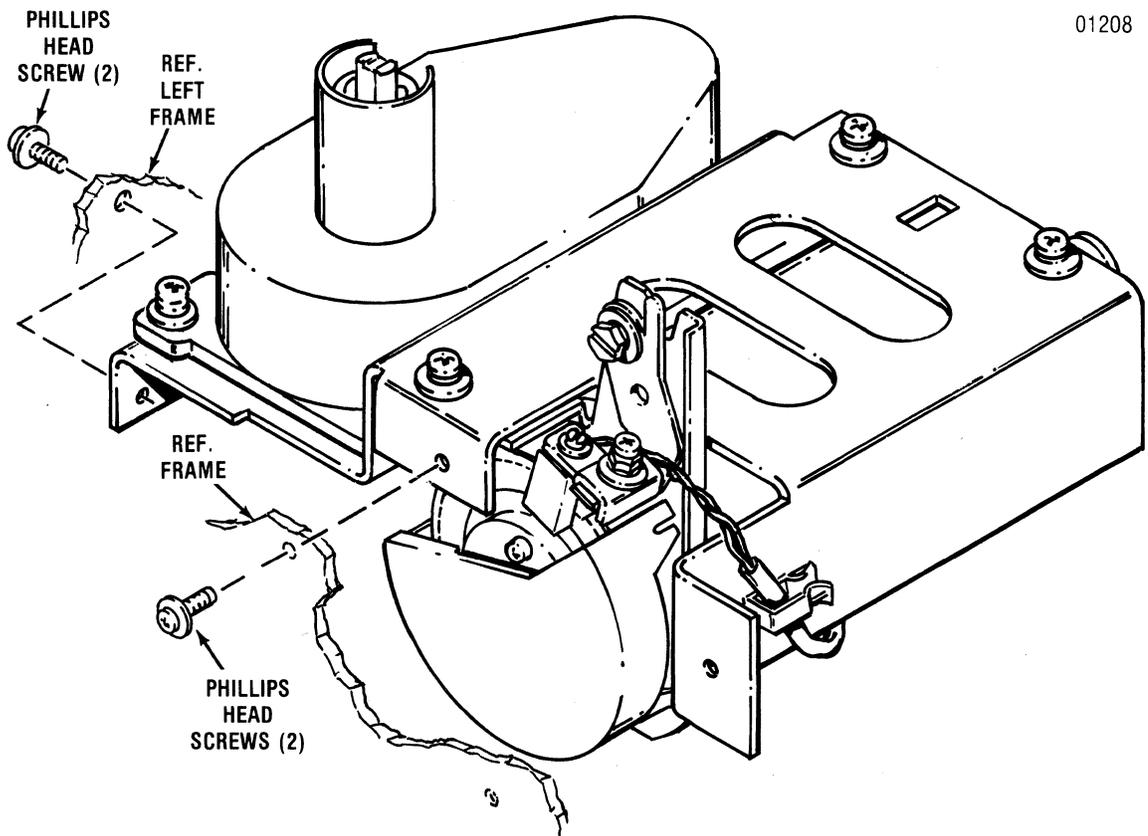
REMOVAL/REPLACEMENT, CARRIAGE DRIVE MOTOR BELT CARRIAGE DRIVE BELT
